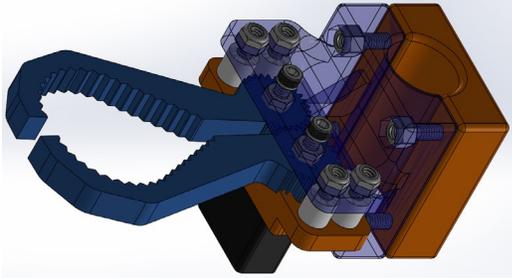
Servo-actuated gripper. Main bracket is transparent to showcase machined gear teeth. The jaws were cut from 6061-T6 on the AWJ, and the frame was 3D printed from PETG and waterproofed.
